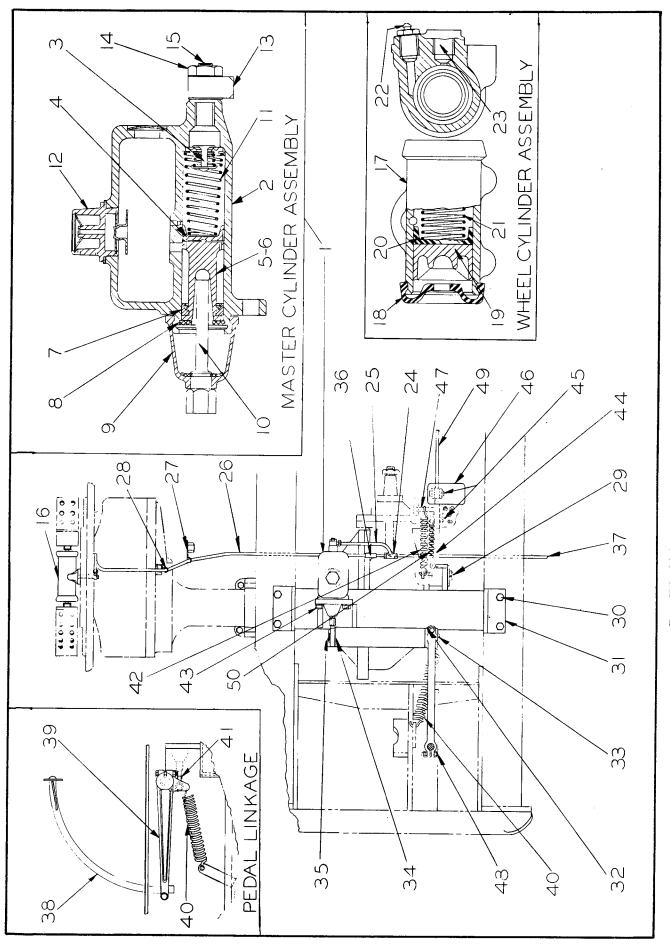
HYDRAULIC BRAKE SYSTEM
